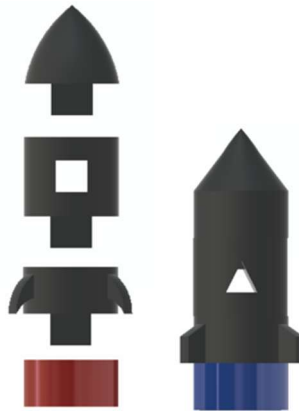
Example of Unassembled and Assembled Rocket Game Pieces
